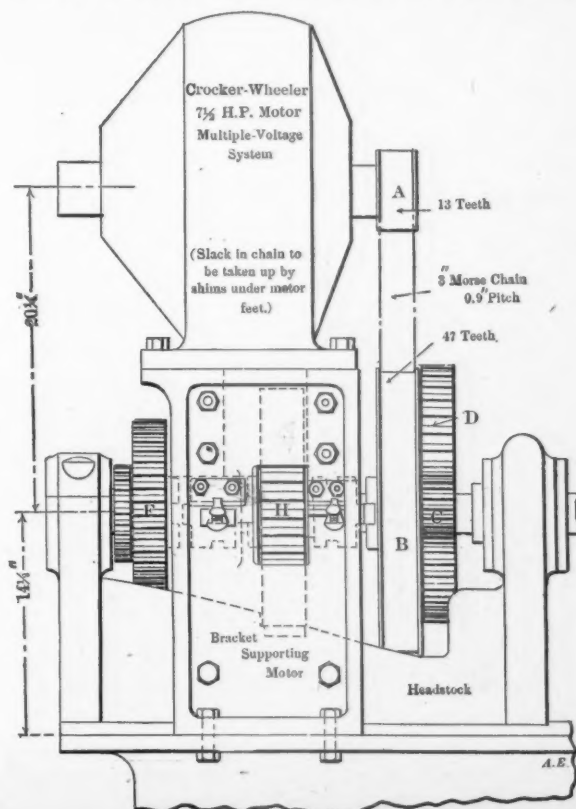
METHOD OF MOUNTING THE MOTOR UPON THE 25-IN. PUTNAM LATHE.
